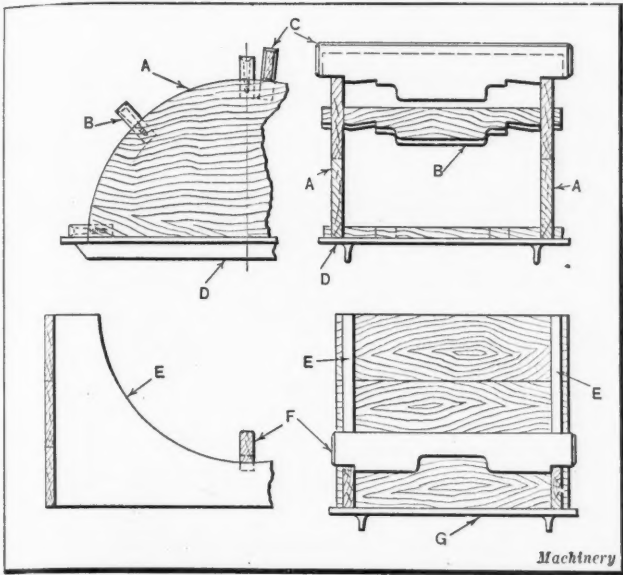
Skeleton Molds used in making Ring Casting shown in Fig. 1
